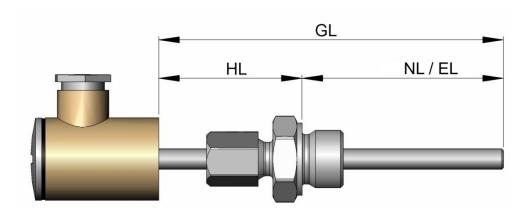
Relvant dimensions of screw-in thermometers with connection head
